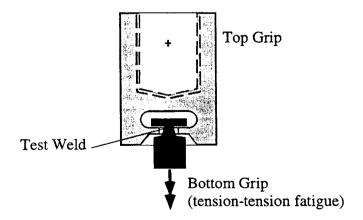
Schematic of Set-Up Used to Fatigue-Test Assembly Welds
